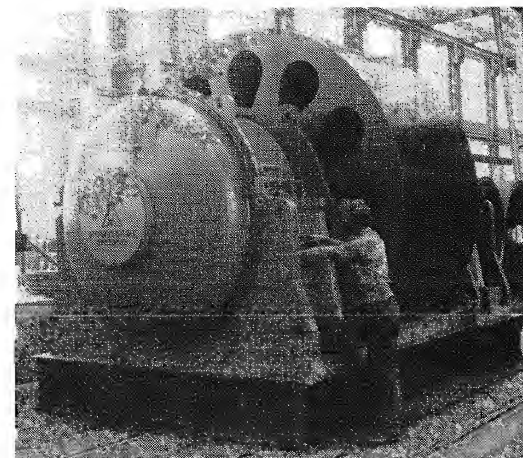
Kiln roller with mounting (KHD Humboldt Wedag AG, Cologne)
